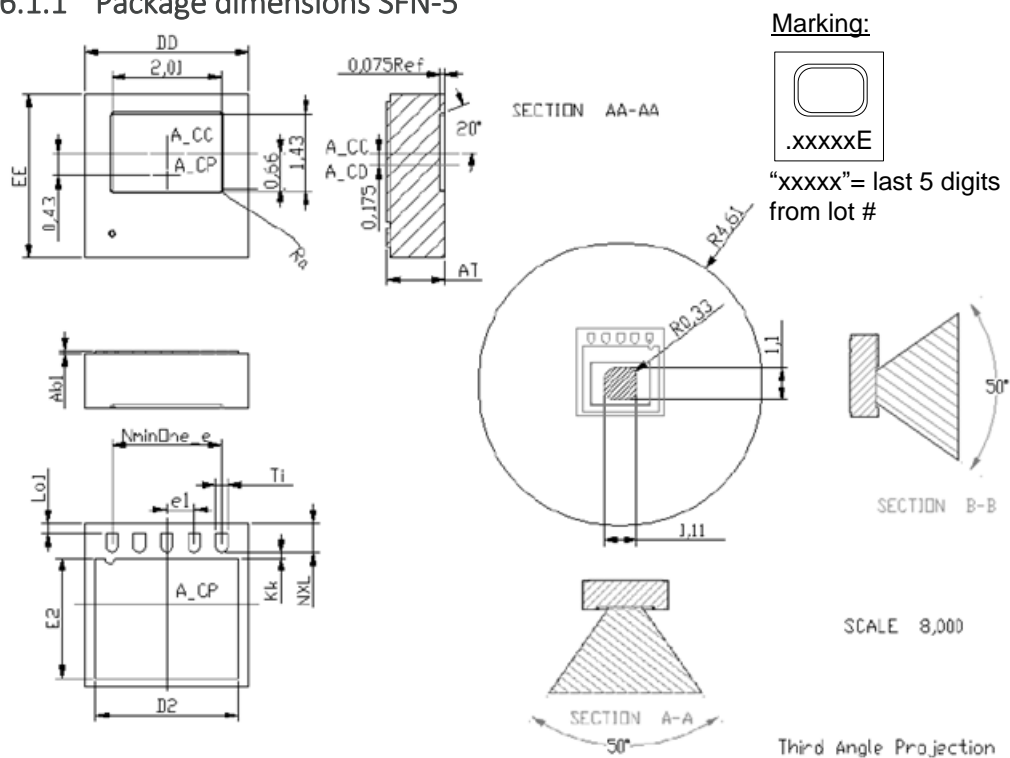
Package dimensions for MLX90637. All linear dimensions are in [mm]
